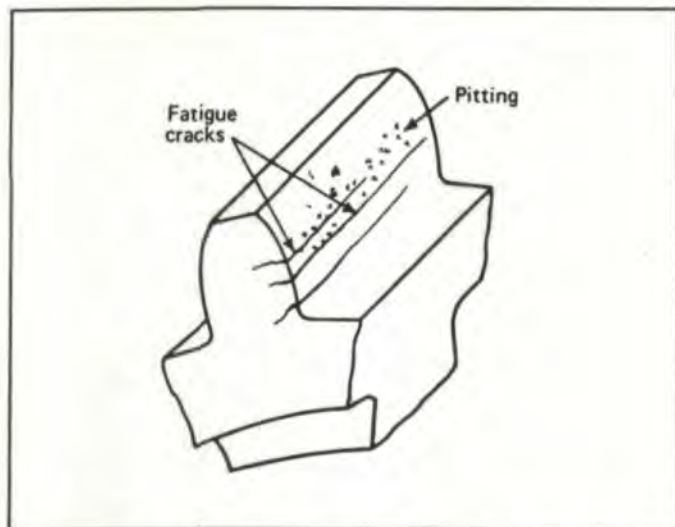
Typical pits and fatigue cracks⁽⁷⁾
